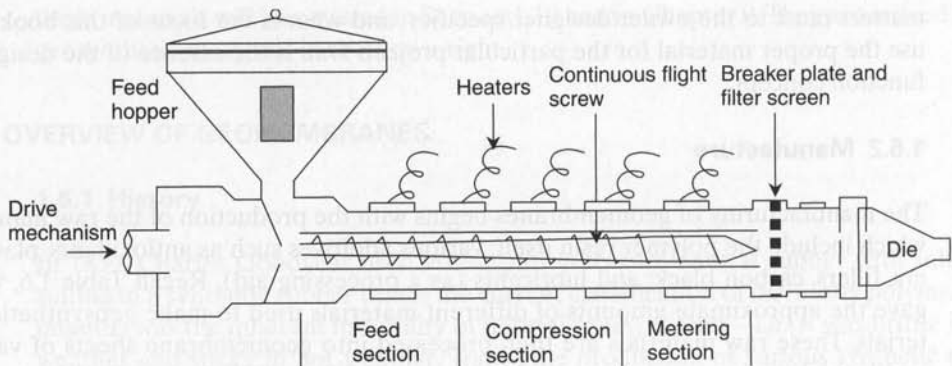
Cross-section diagram of a horizontal single-screw extruder for polymer processing.
